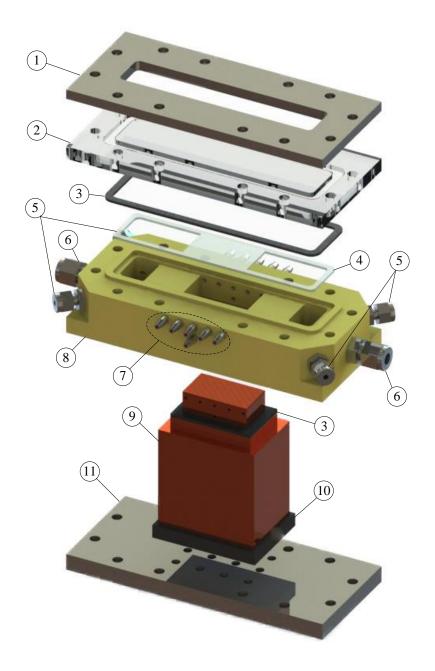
The exploded view of the test section consists of: (1) Stainless top plate, (2) Ttransparent polycarbonate plate, (3) Rubber seal, (4) Urethane thin sheet, (5) Thermocouple and pressure transducer connector ports, (6) Inlet and outlet connector ports, (7) Thermocouple connector ports, (8) G-10 housing, (9) Microchannels test piece, (10) Insulator plate and (11) Stainless bottom plate.
